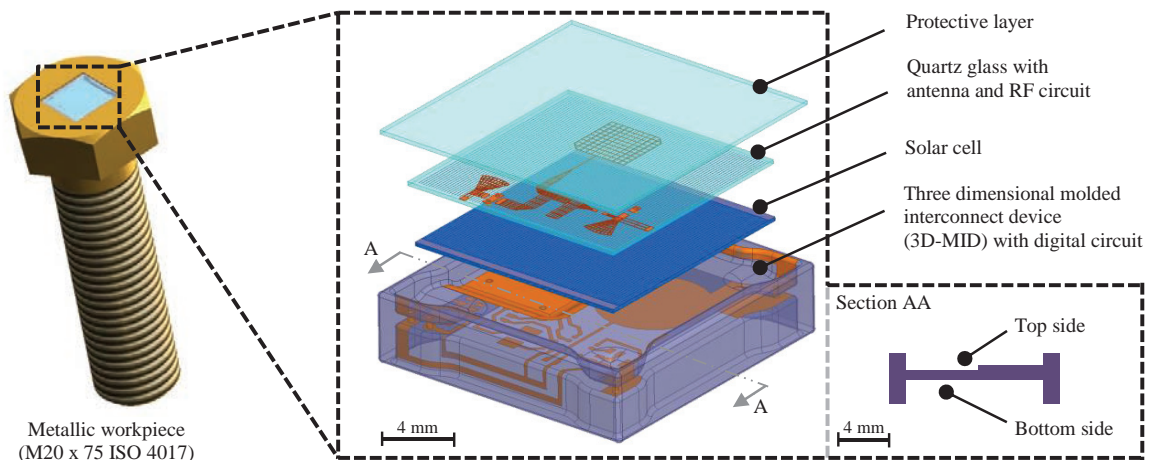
24 GHz communication module integrated into a metallic workpiece; exploded view of the module and cross section view of the 3D device
